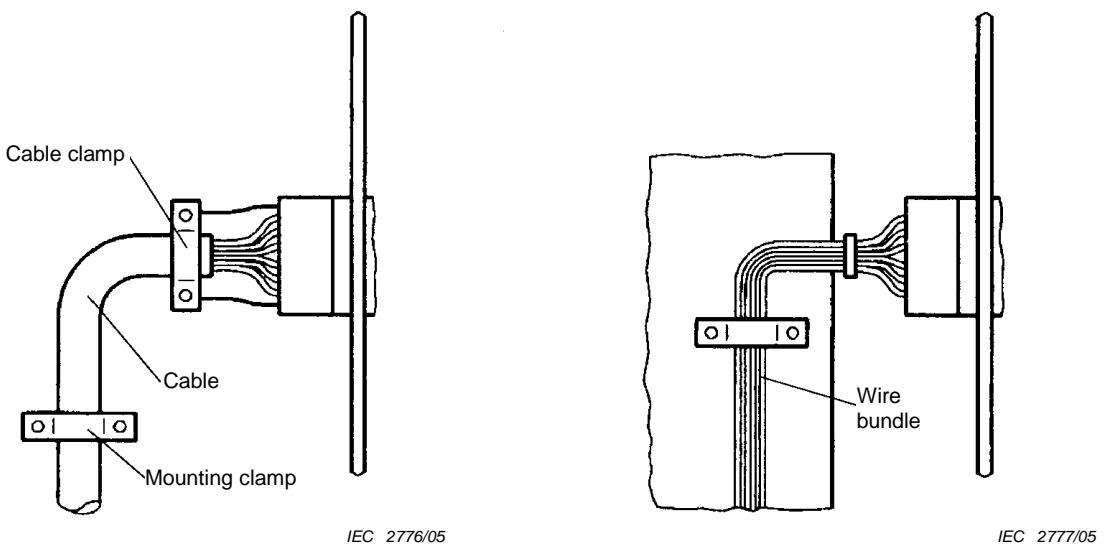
Mounting of wire bundles/cables with crimped contacts
